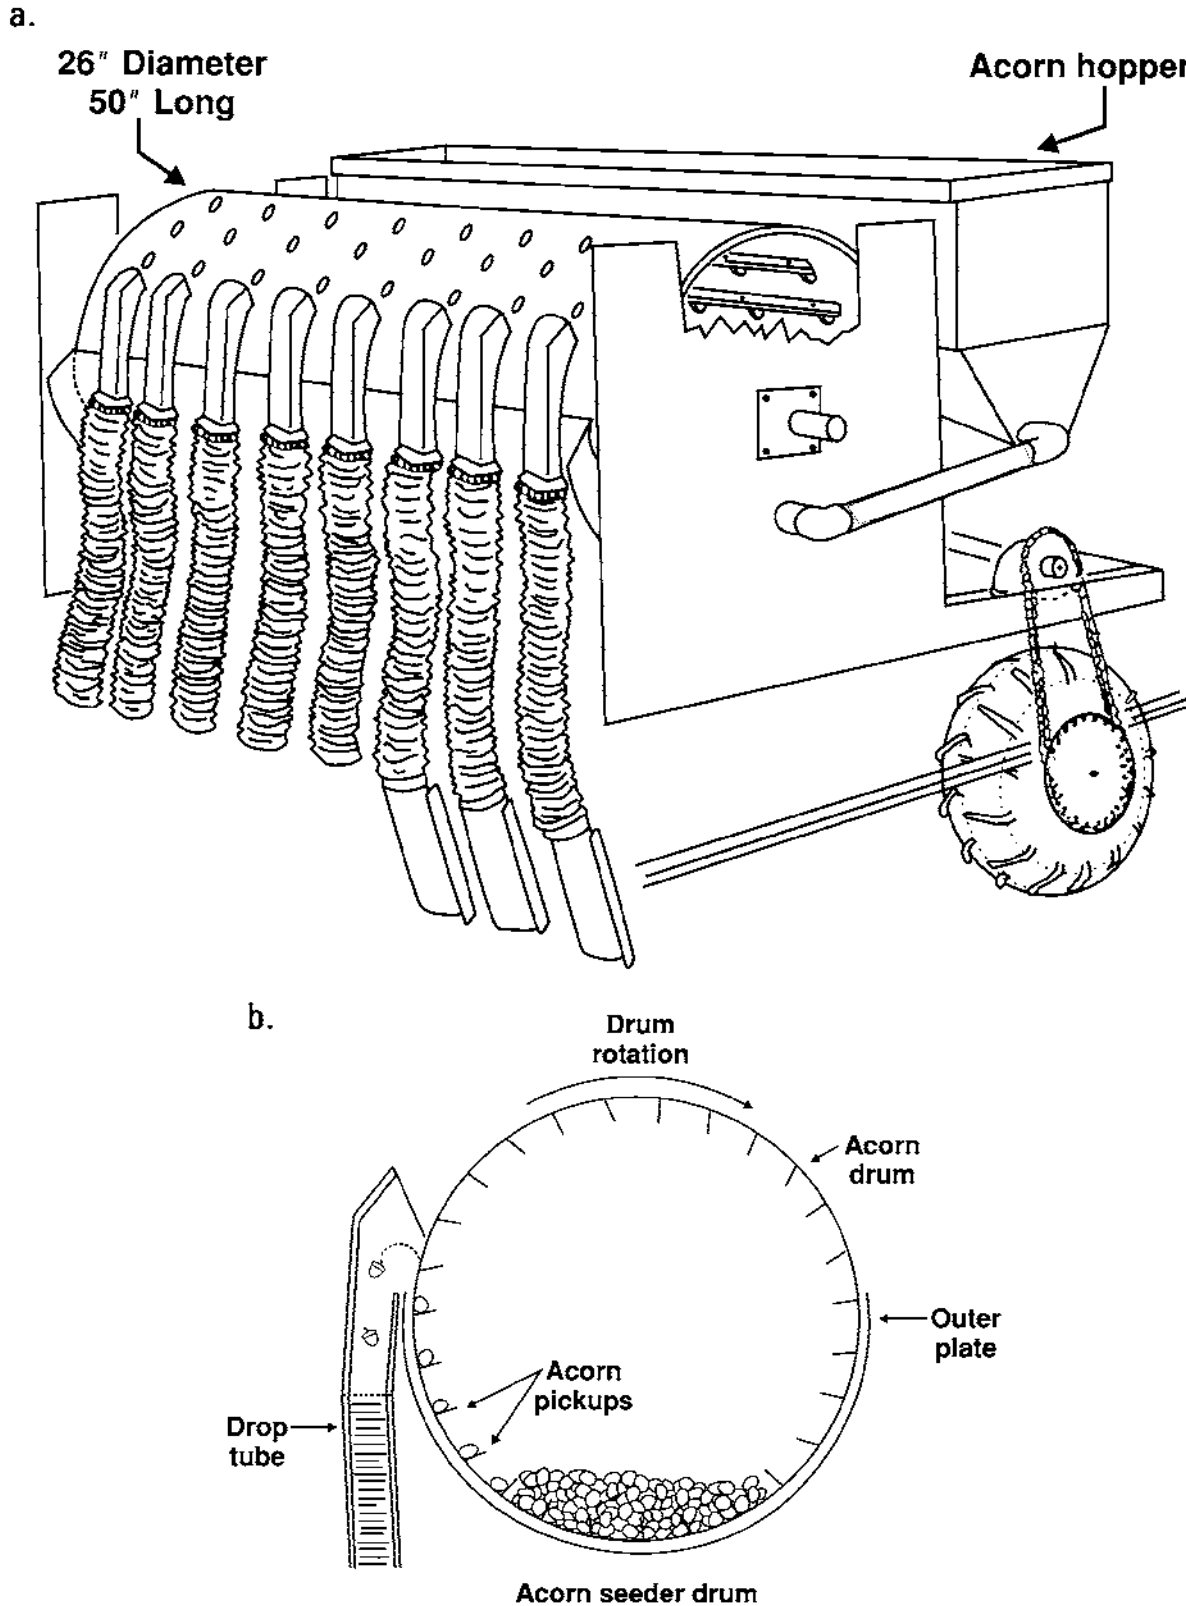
Machine developed by U.S. Forest Service for sowing acorns in nursery seedbeds: (a) machine sowing acorns and (b) schematic drawing of hopper mechanism.
